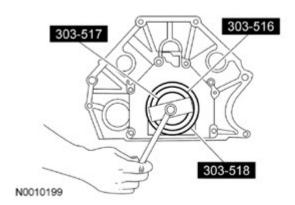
Installing Crankshaft Rear Oil Slinger Using Special Tools Courtesy of FORD MOTOR CO.
